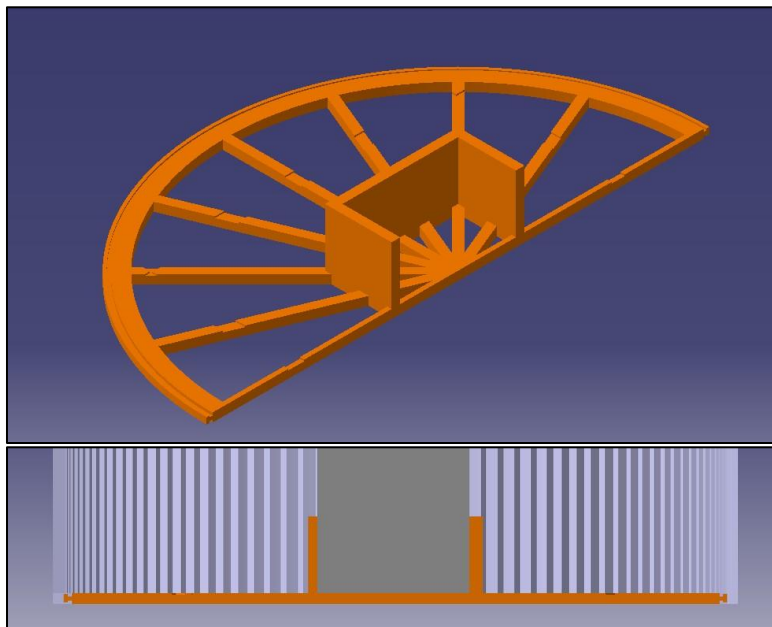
Isometric View of Top Electric Power Assembly Ring Fixture (Top) and Front View of Top Ring Fixture with Electric Assembly in Payload Bay (Bottom)
